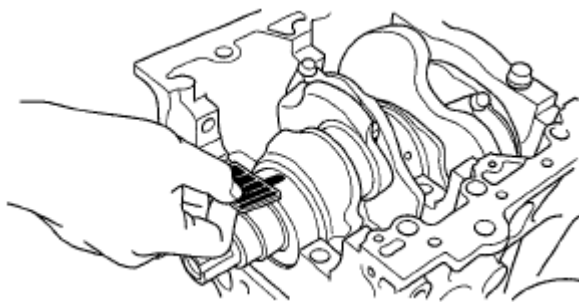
Measuring Main Bearing-To-Journal Oil Clearance
